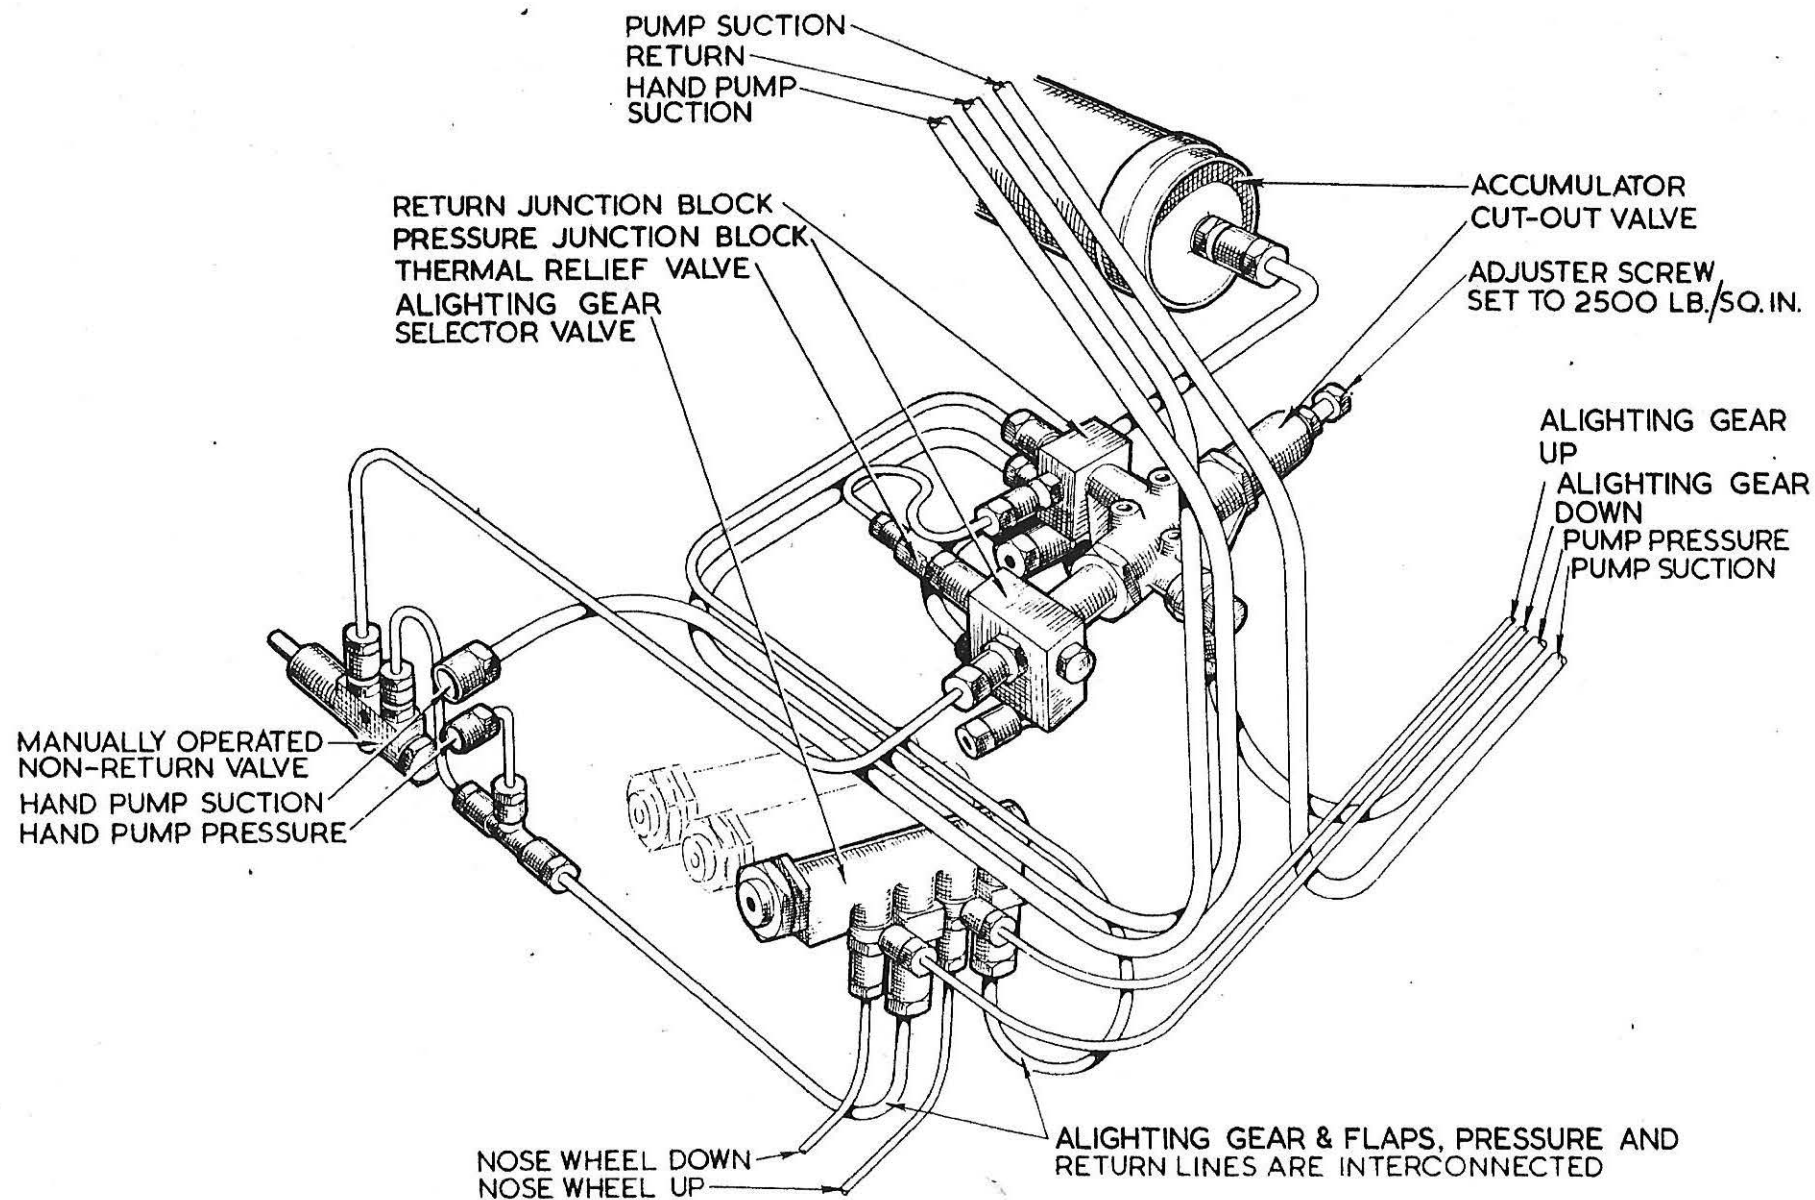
ALIGHTING GEAR HYDRAULIC SYSTEM
